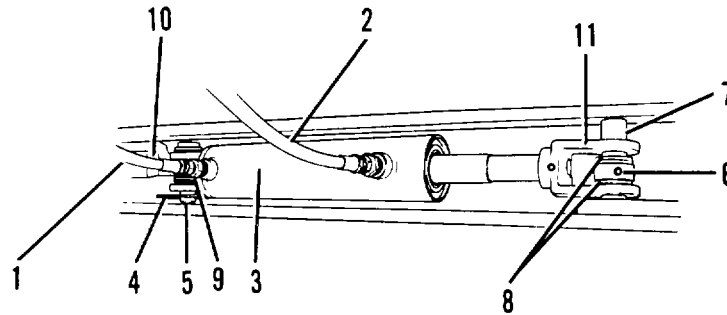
Steering Cylinder (Sheet 2 of 2).
